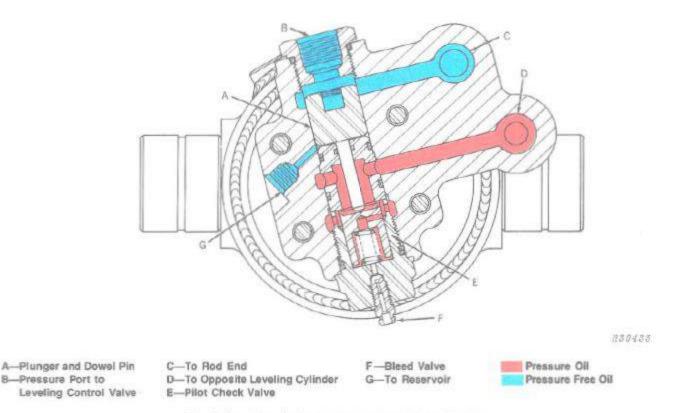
Operation of Valve Block - Leveling Cylinder Extending
